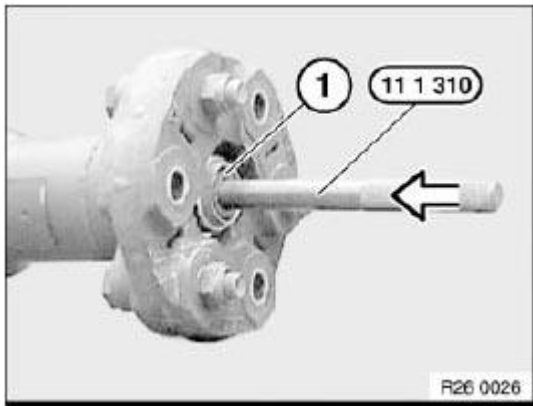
Identifying Special Tool (11 1 310) Into Centering Bore
